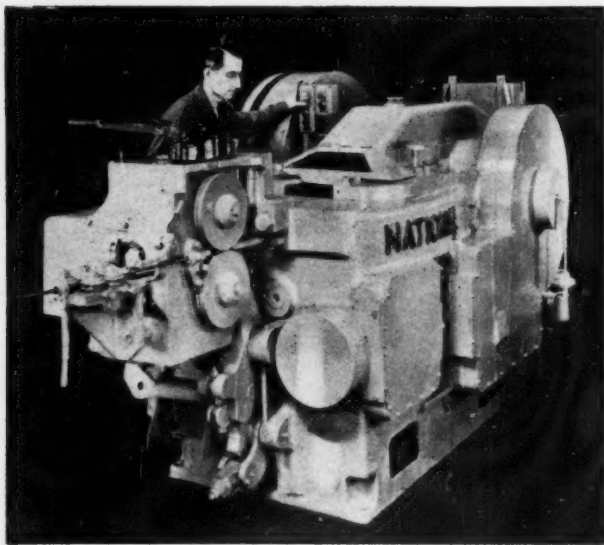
National 4-in. Capacity Double-stroke Cold Heading Machine
